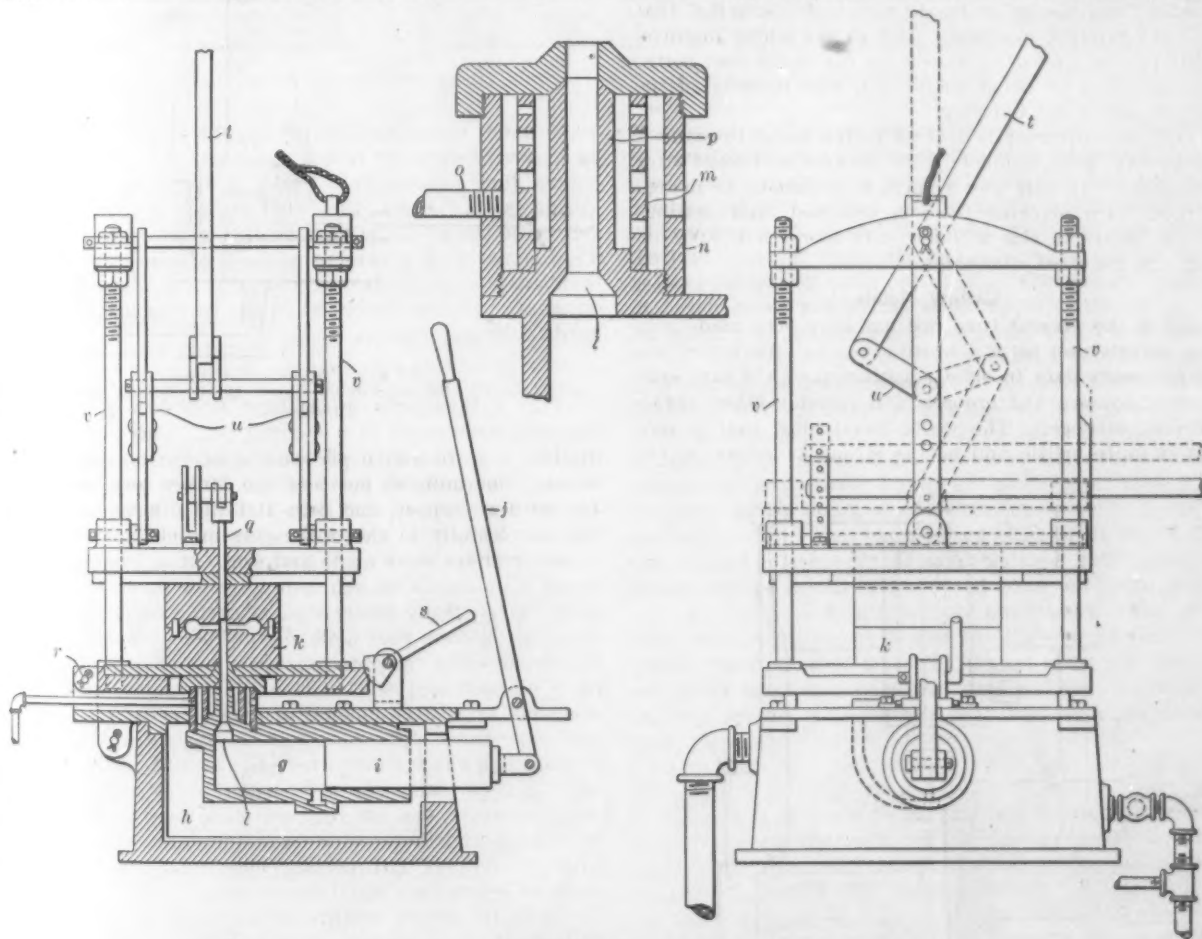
An Upright Hand-Operated Plunger Machine.
